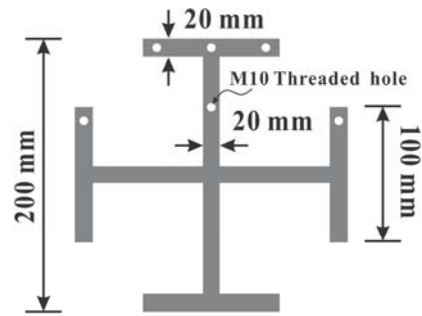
Cross-shaped steel plate (15 mm thickness) with threaded holes
